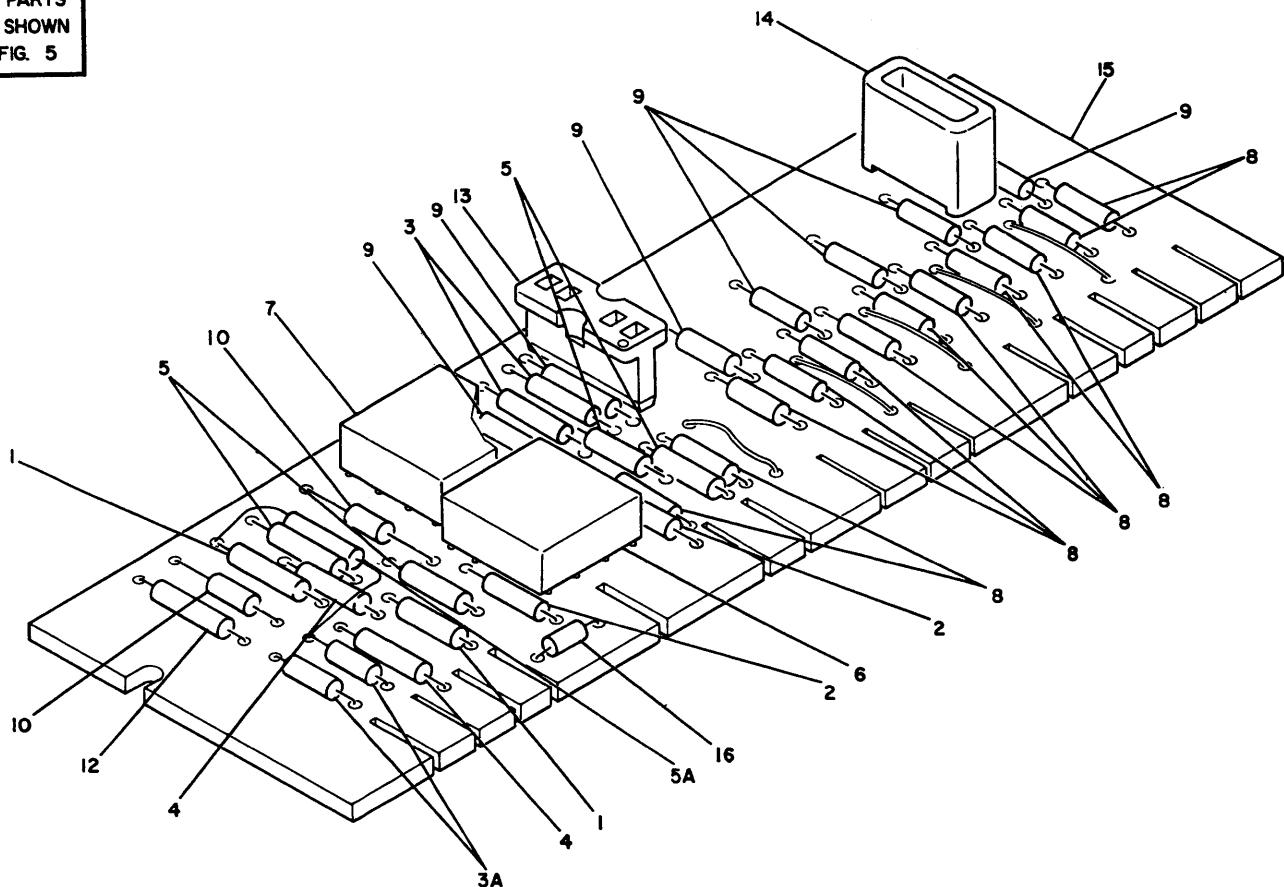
PREAMP READ CARD ASSEMBLY. SEE LIST 13.
